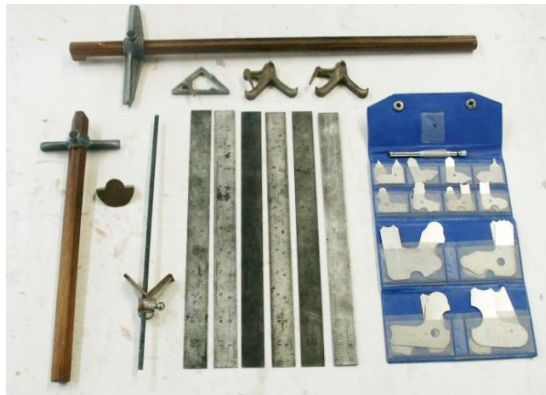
Center are shrink rule; right is radius gage; far left is a match plate scribe, edge finder for dividers and depth/center gage; top is a long match plate scribe, square/45 and center finders for the rules.
